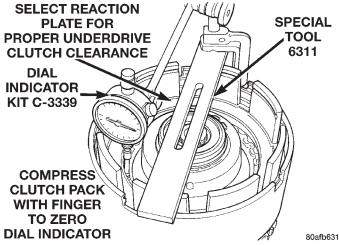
Set Up Dial Indicator for Clutch Clearance
